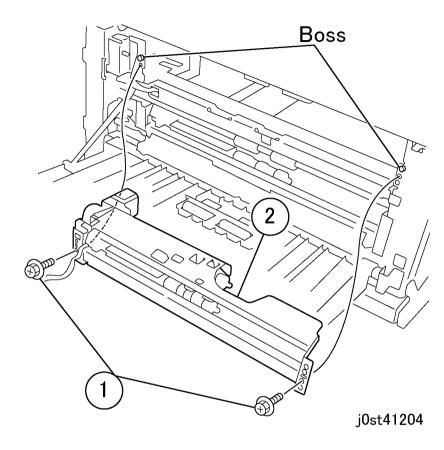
Removing the Tray 3 Feeder (j0st41204)
